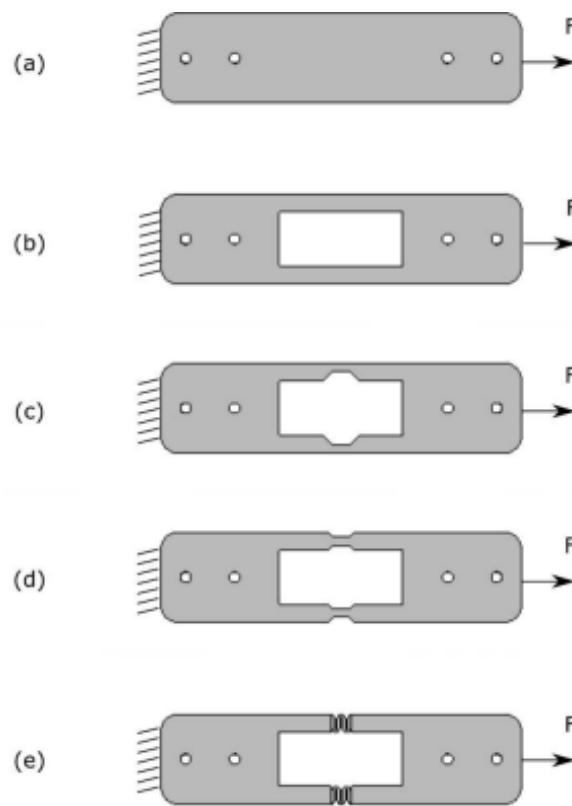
Different mounting plate designs used for stress analysis: (a) straight rectangular mounting plate; (b) tapered mounting plate; (c) curved mounting plate; (d) narrow mounting plate; and (e) spring mounting plate [4].
